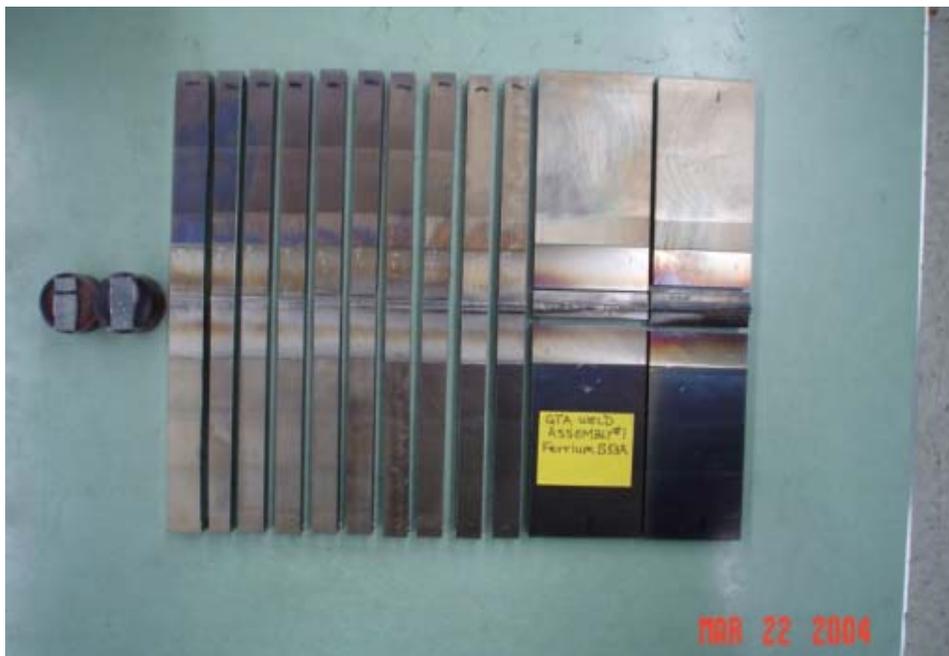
Photograph of Weld Assembly # 1 (Root Side) after sawing specimen blanks and flattening; two metallographic mounts of cross-sections.
